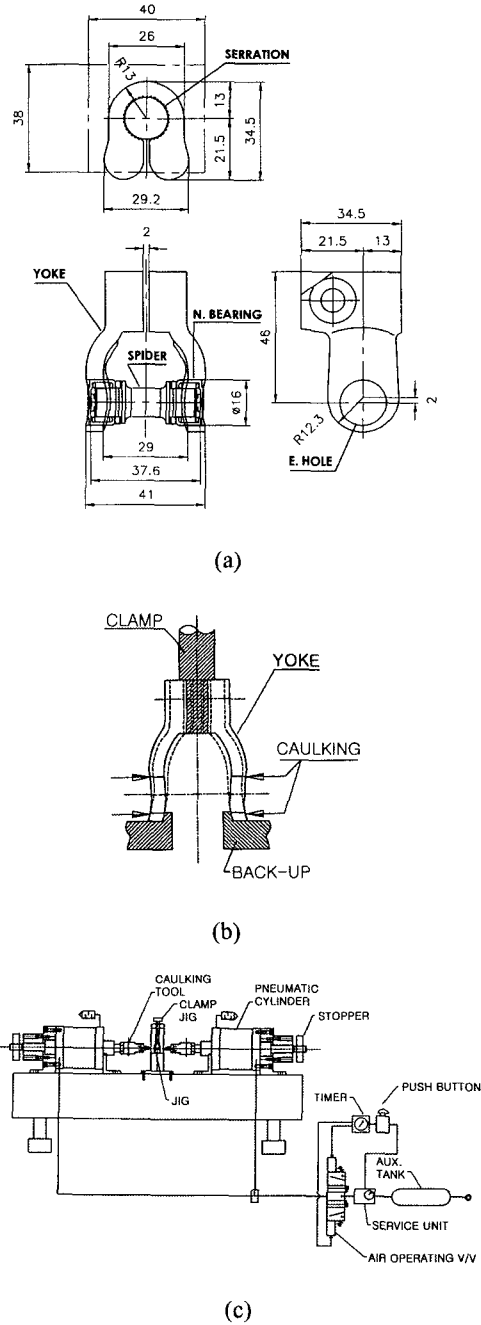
Yoke caulking process (a) Part drawing (b) Clamping and fixture schematic (c) Pneumatic process testing layout
